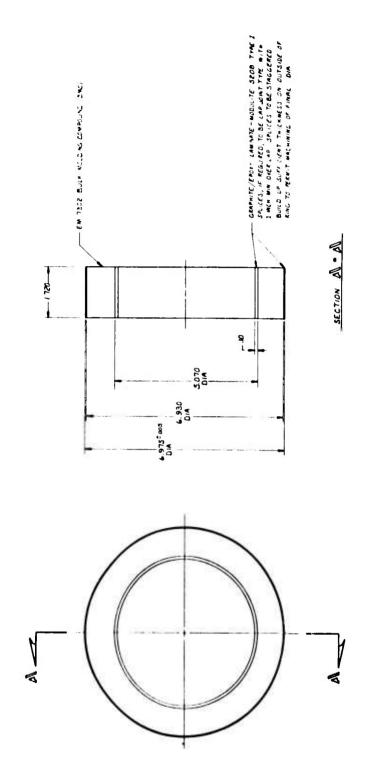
Bearing Ring, Auxiliary (WRD Drawing No. 4694).
